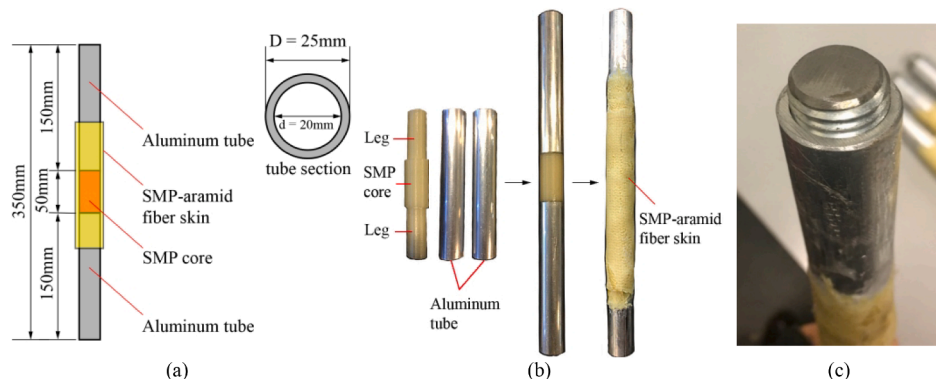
SMP structural joint test specimens: (a) specimen dimensions; (b) specimen assembly; (c) specimen end fitted for clamping.
